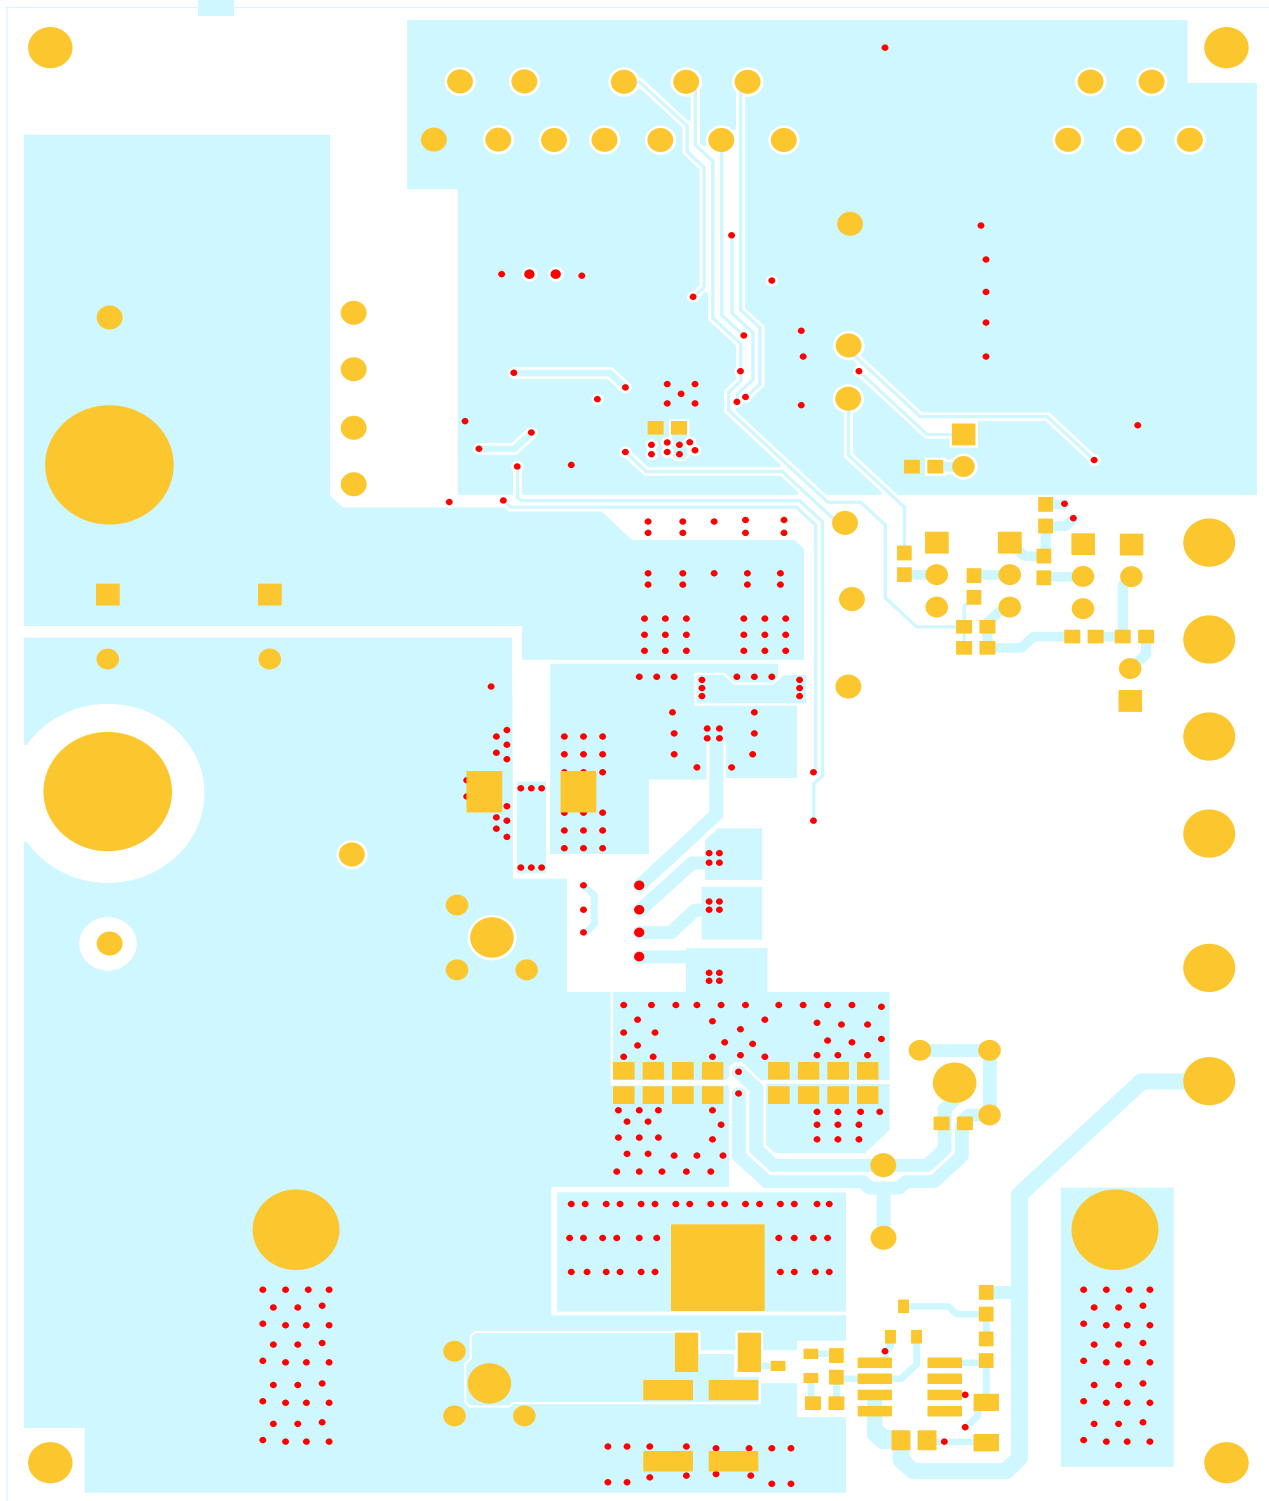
ISL6263CEVAL1/1Z AND ISL6263DEVAL1Z EVALUATION BOARDS PCB BOTTOM ETCH
